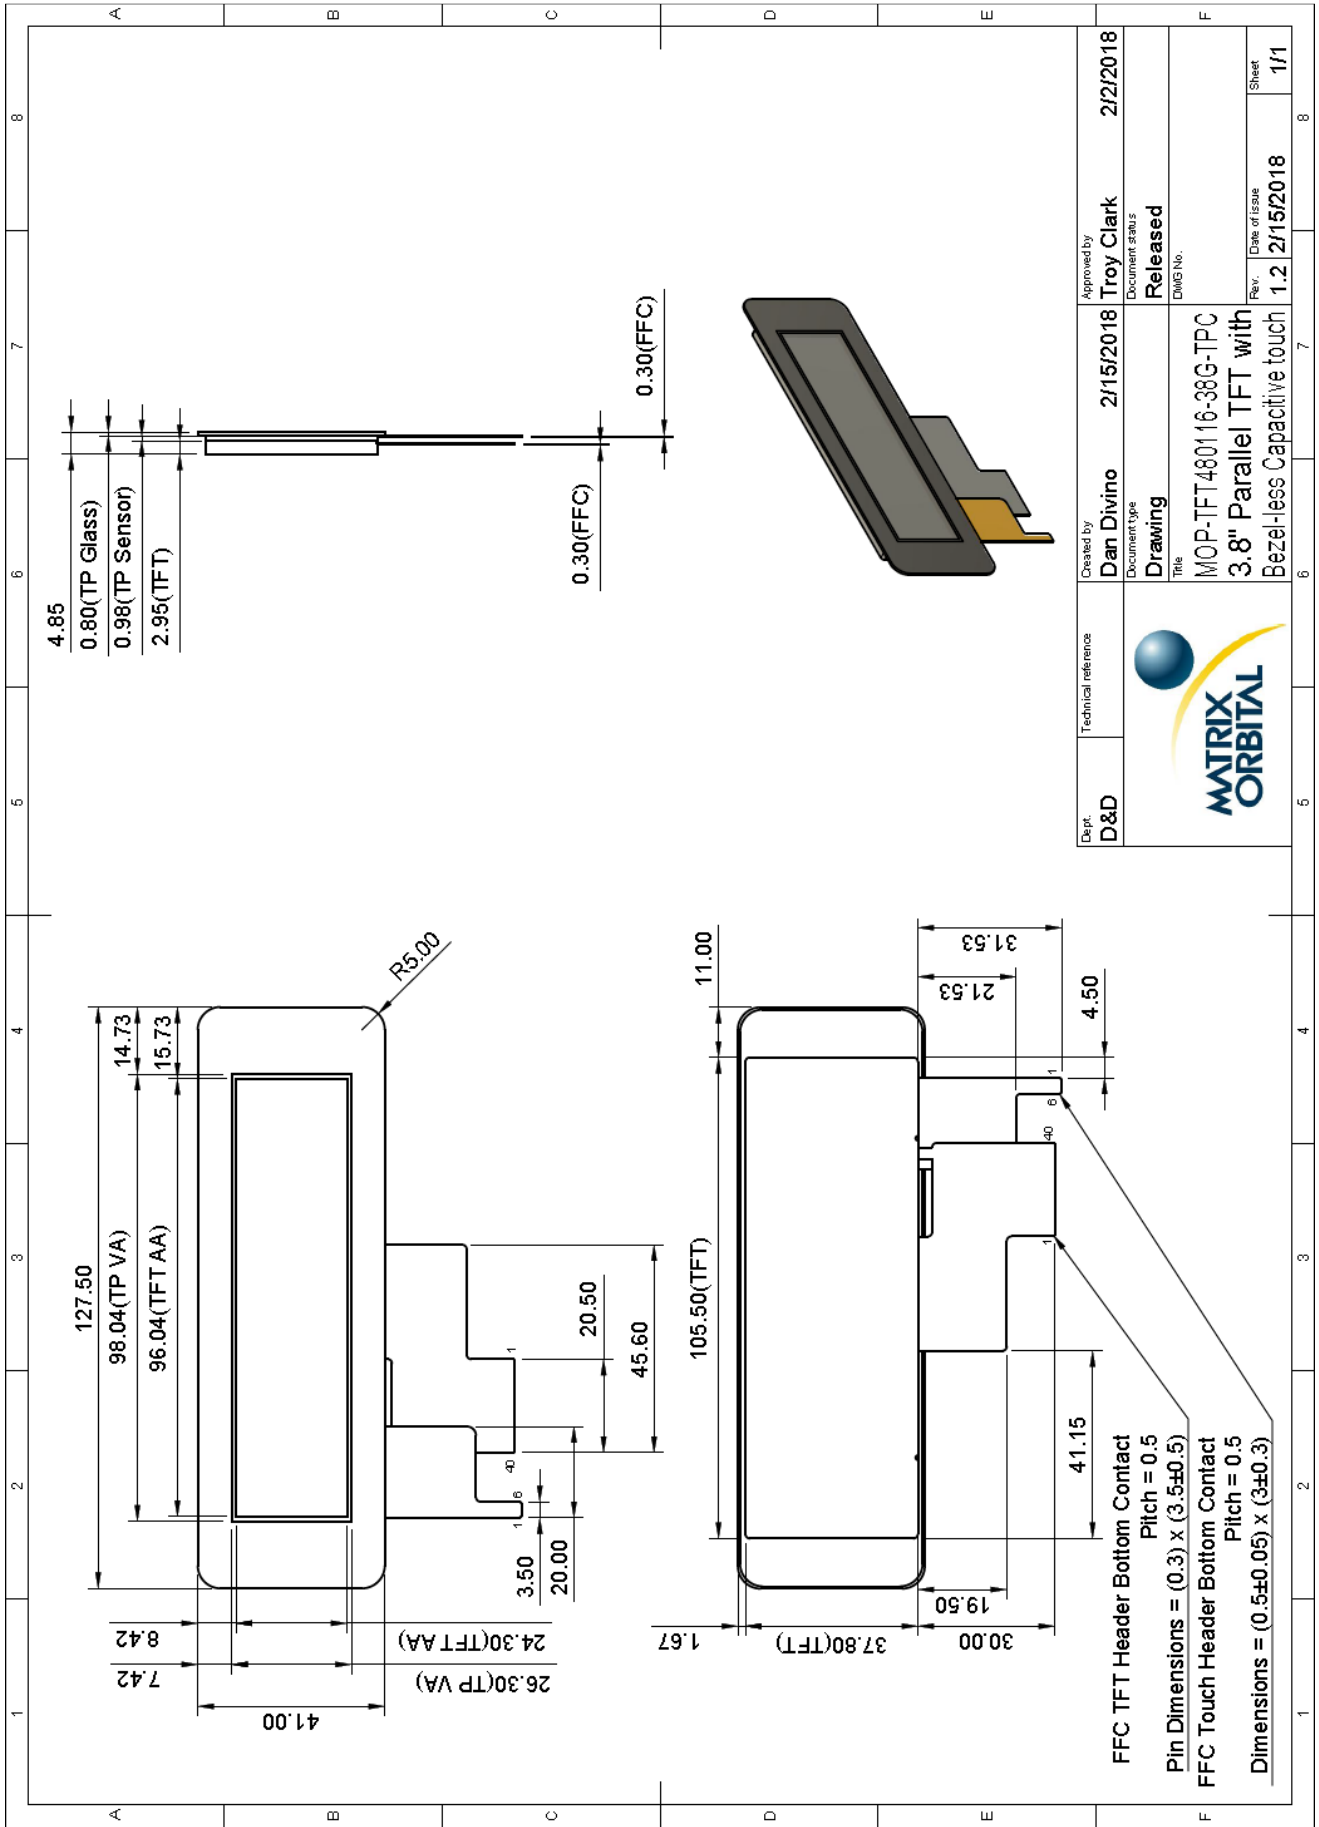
MOP-TFT480116-38G-BLH-TPC Drawing
